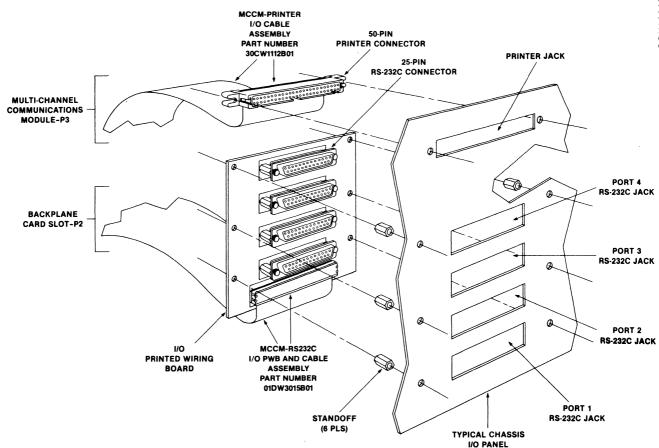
Rear Panel Connector Installation Using The Optional M68KVM232CP Cable Assembly
